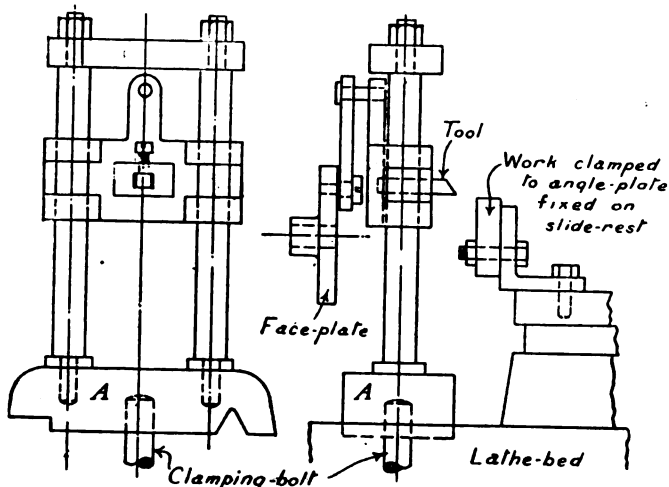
FRONT AND SIDE ELEVATIONS.
